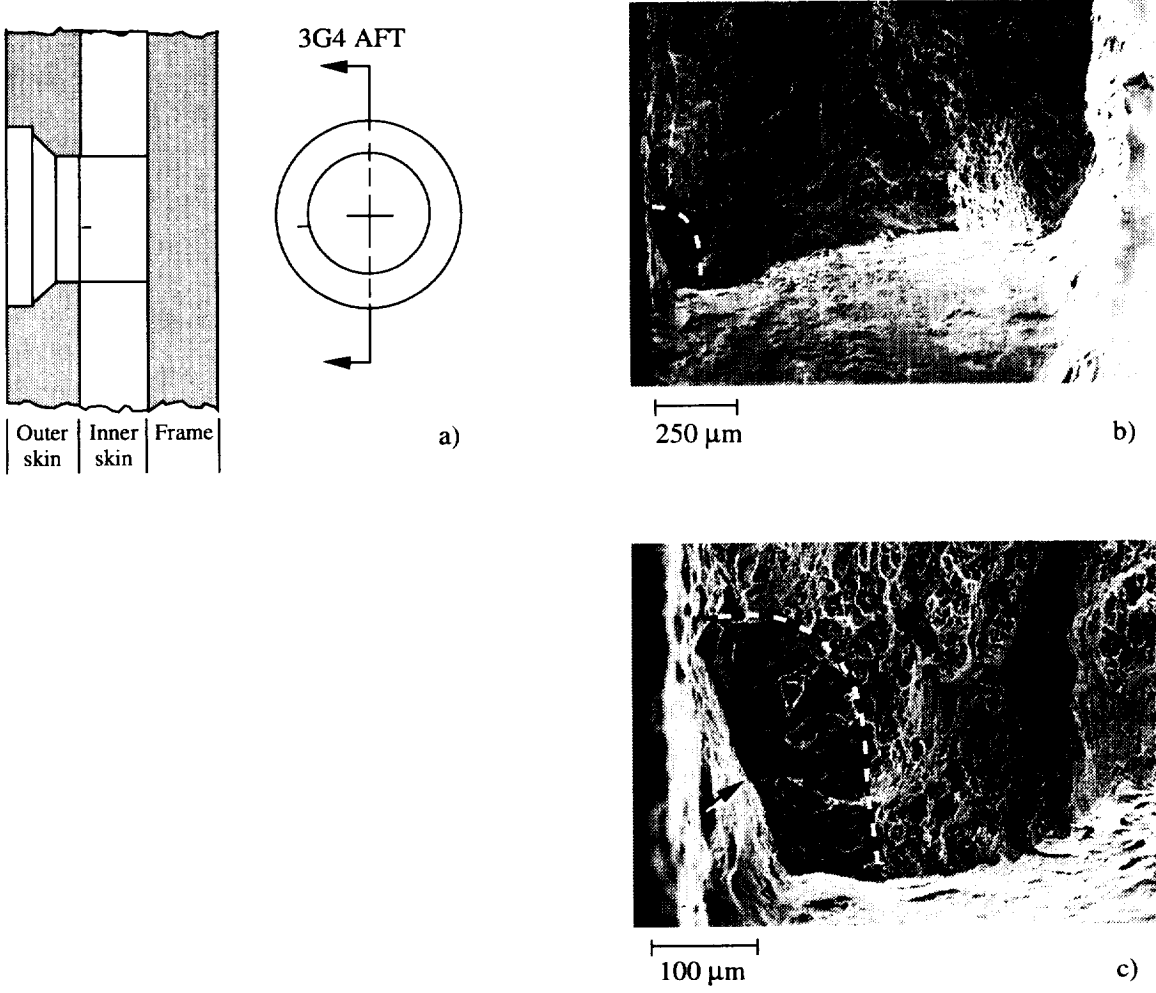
a) The schematic shows the rivet hole 3G4 configuration and the location of the inner skin fatigue crack oriented in the aft direction below the 9 o'clock position. b) The SEM micrograph shows the fatigue crack at the outboard corner of the rivet hole. The dashed line marks the fatigue crack front. c) The SEM micrograph shows the region of crack initiation (arrow) at the outboard corner of the rivet hole. The dashed line marks the fatigue crack front.
